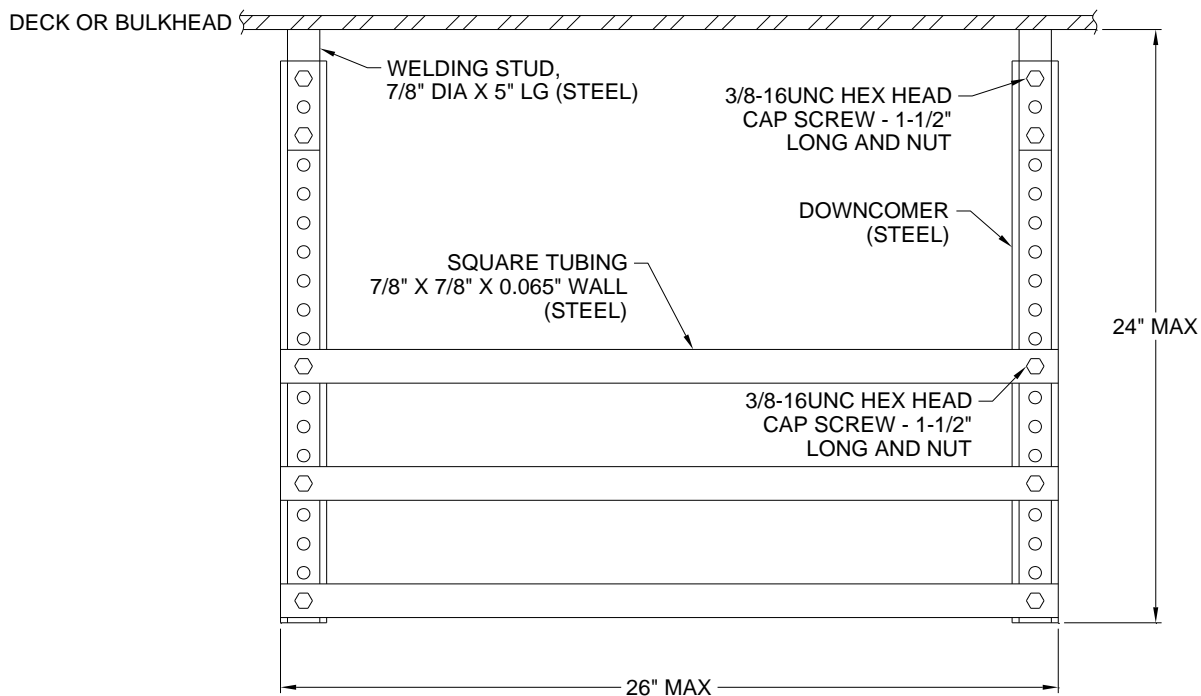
B103. Multiple cableways on steel decks and bulkheads (surface ships) – Continued.
